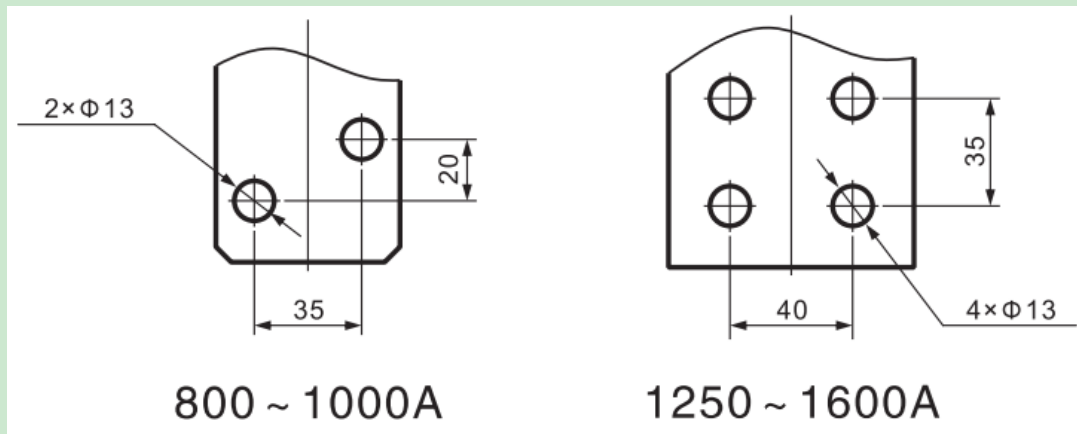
Installation dimension drawings of HGL, HGLi - 1000 (800) - 1600 series switch disconnector
